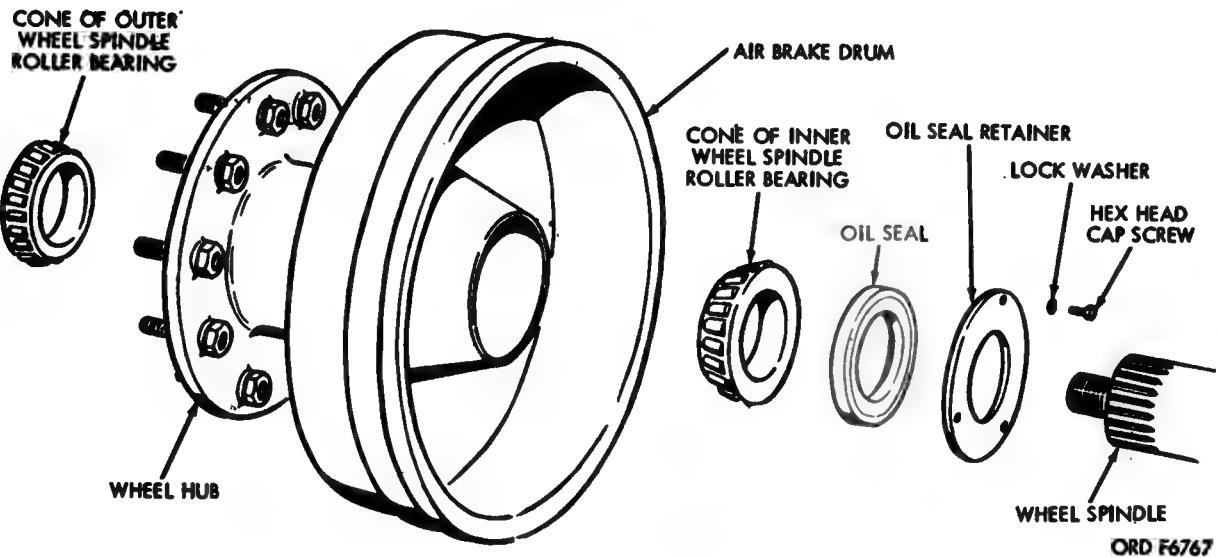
Wheel hub and drum—exploded view (M123A1 only).
